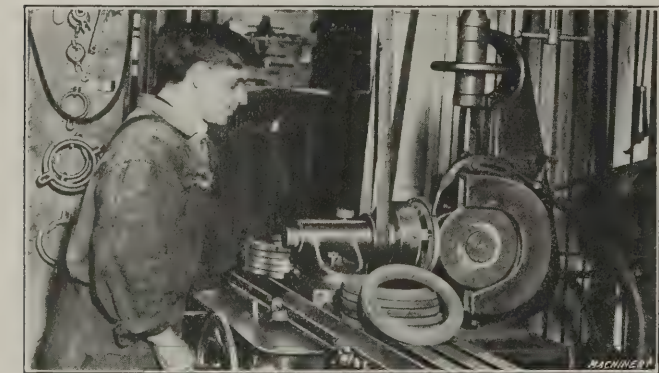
Grinding Thrust Bearing Rings on a Bath Grinder
